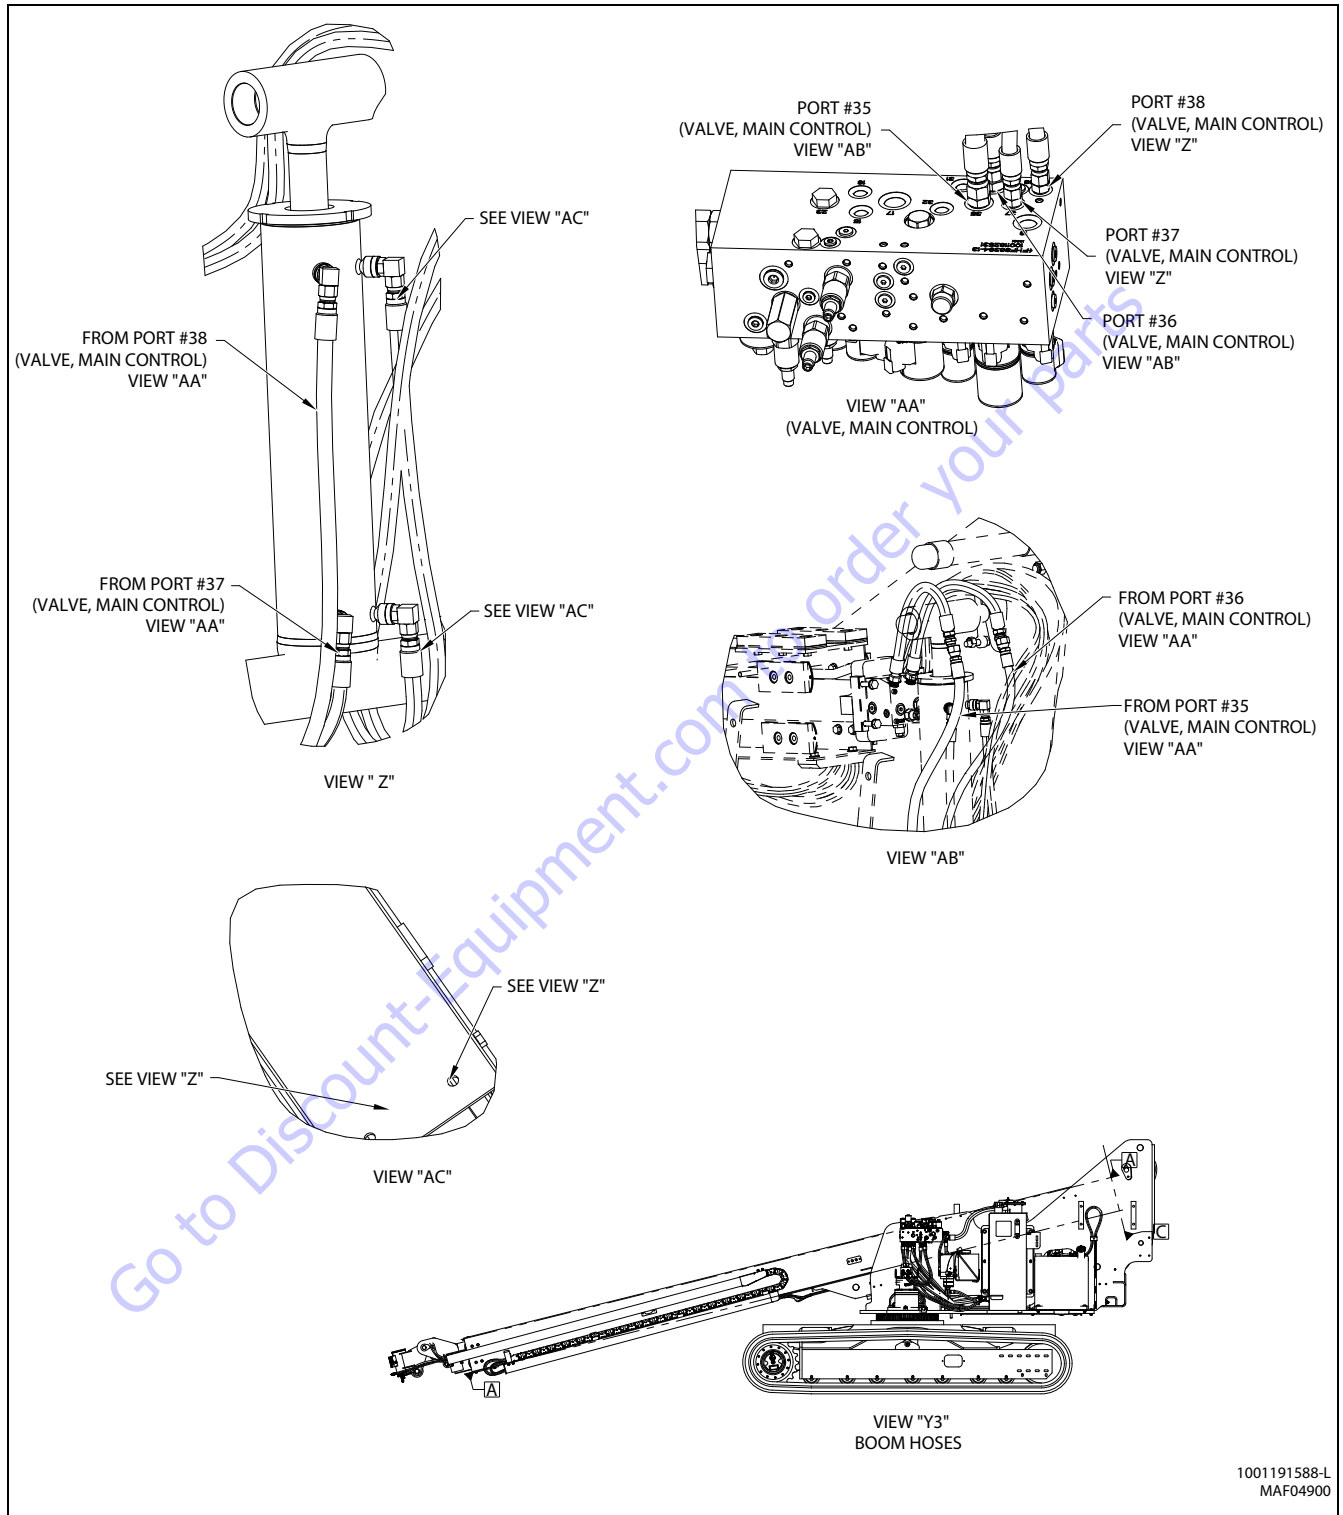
Hydraulic System Installation (400SC) - Sheet 16 of 16
